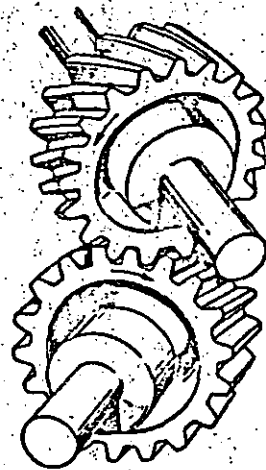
Helical gears on non-parallel shafts. (Courtesy Socony Vacuum Oil Co.)
